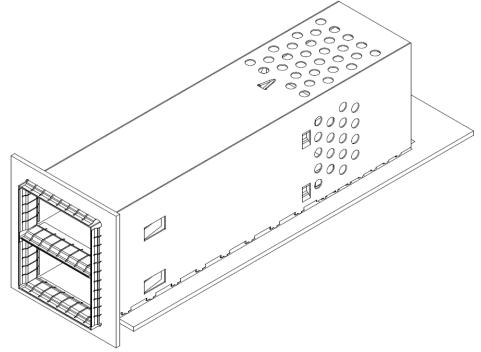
Stacked SMT 2x1 cage with host PCB and the panel
